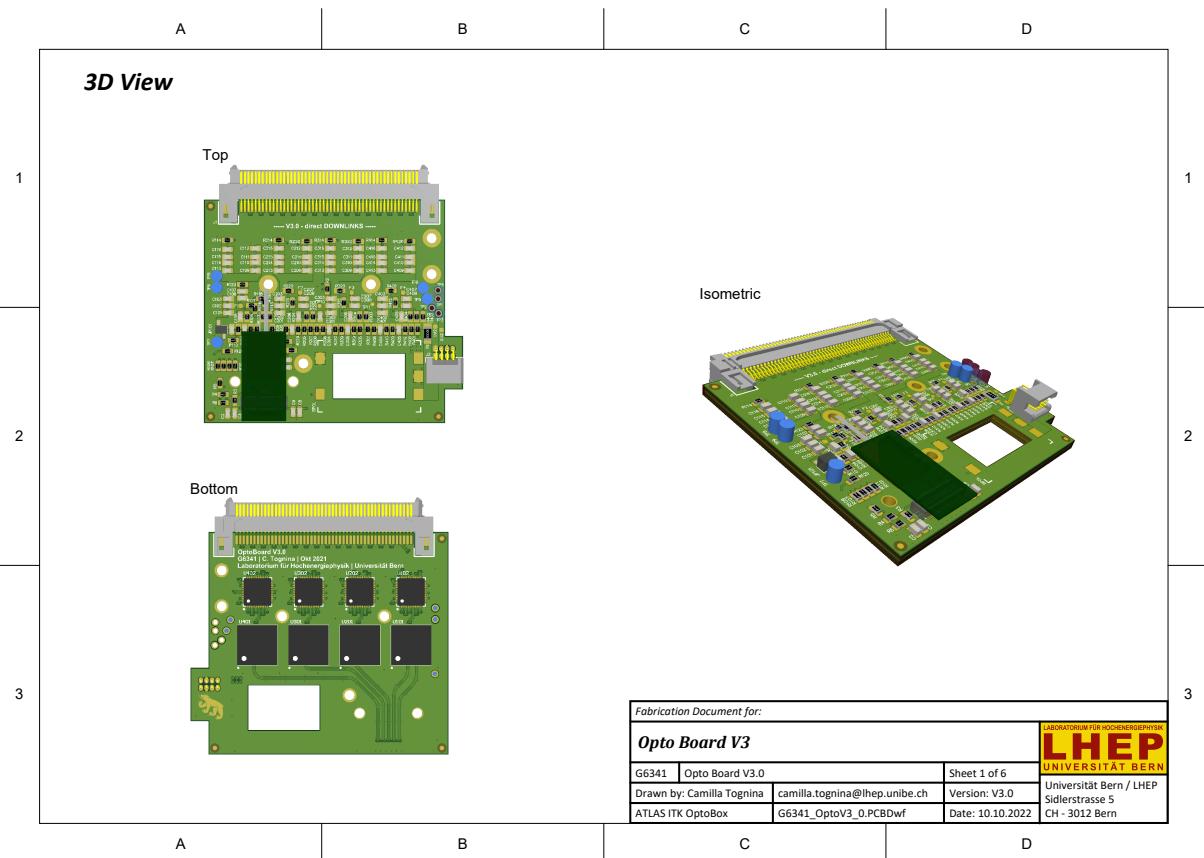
CAD drawing of the Optoboard V3.0. Top left: front side, hosting the VTRx+ and the bPOL2V5, with its carrier board (which would be mounted at the five pads at the hole). Bottom left: back side, hosting the four GBCR and the four IpGBT chips. The rectangular hole, visible on the right-hand side, allows for direct contact between the cooling profile and the bPOL2V5 carrier board. The ERM8 connector to the termination board is mounted on the top. Right: An isometric view of the front side.
